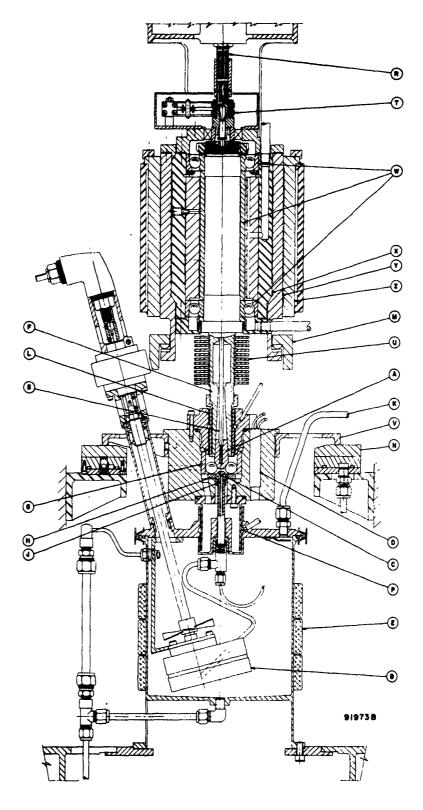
CROSS SECTION OF THREE-BALL/CONE FATIGUE TESTER
